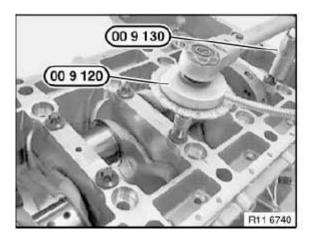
Identifying Special Tools 00 9 120 And 00 9 130 Courtesy of BMW OF NORTH AMERICA, INC.
